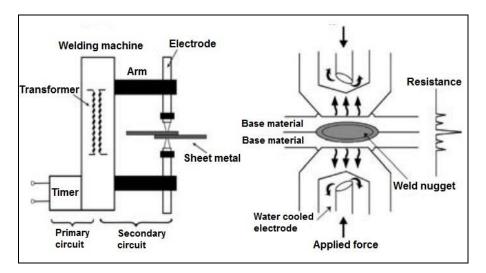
Illustration of resistance spot welding machinery and the welding process (Modified: El-Banna, Filev & Chinnam, 2008, p. 220).
